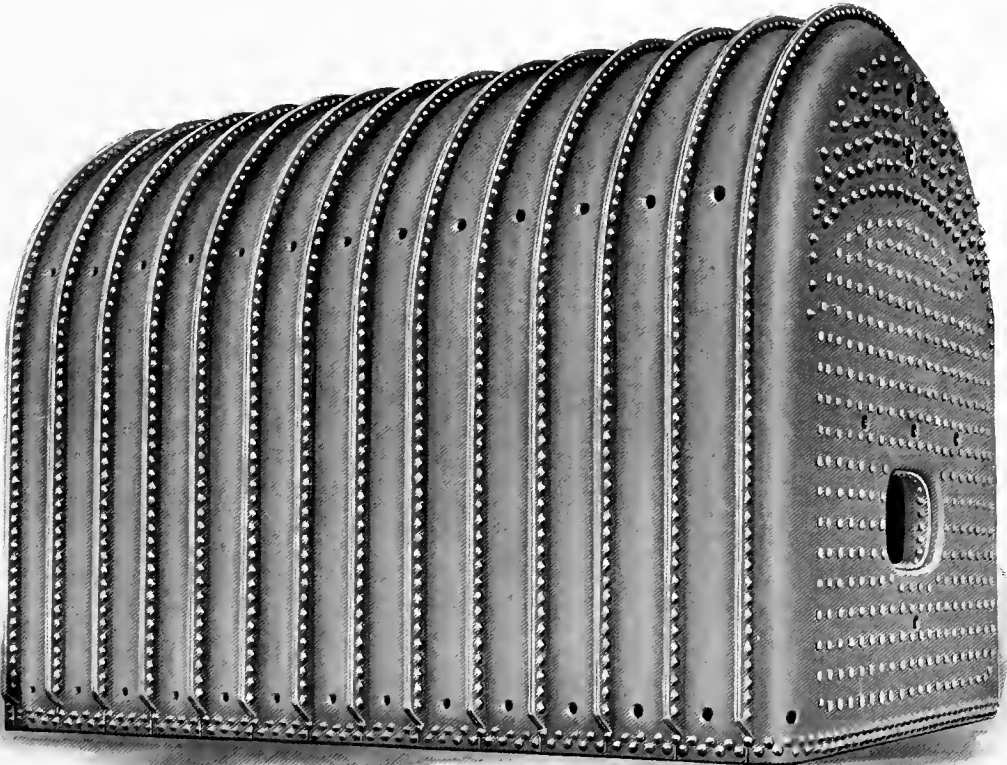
The completed Jacobs-Shupert back end ready for application to boiler shell.
